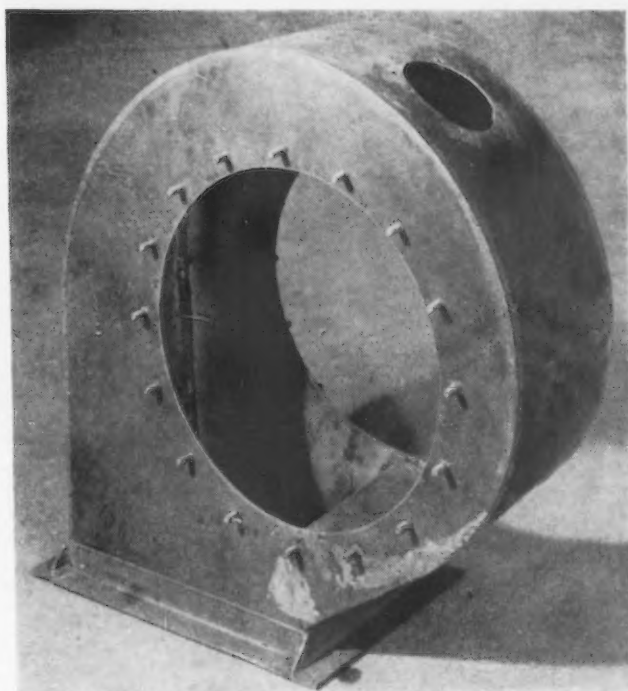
A typical application of stud welding is soon on this blower housing.
